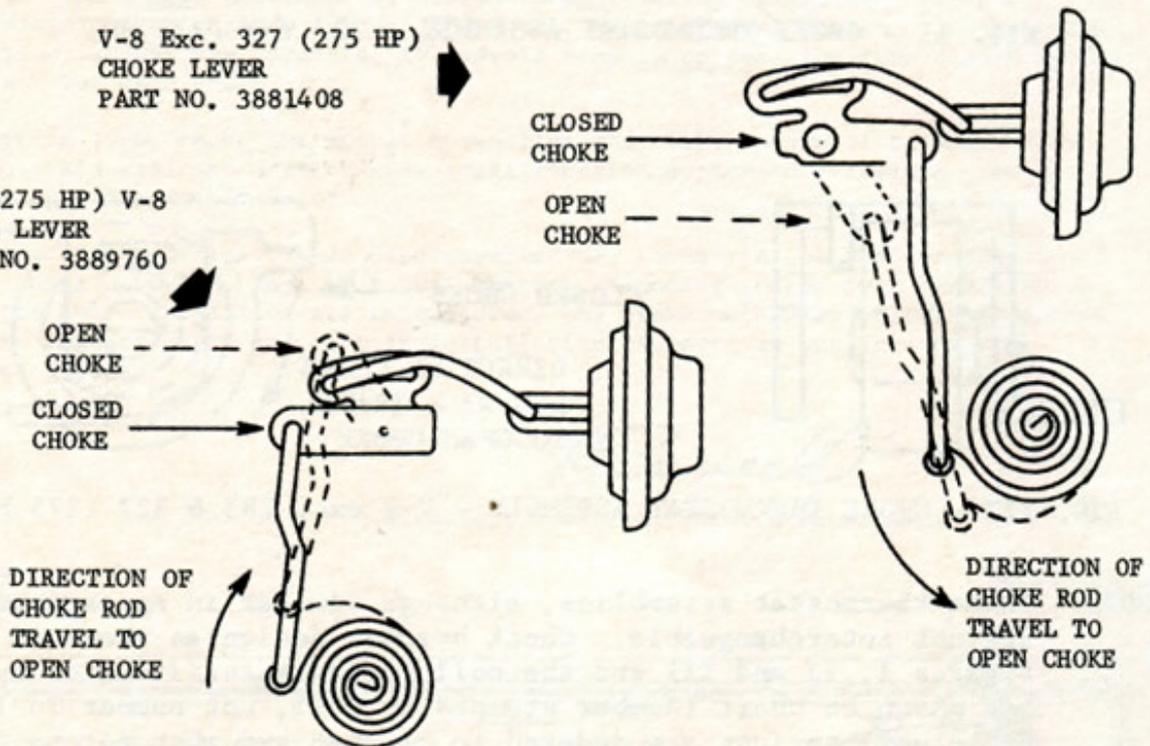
FIG. V - HOLLEY CHOKE LEVER AND VACUUM BREAK ASSEMBLY
